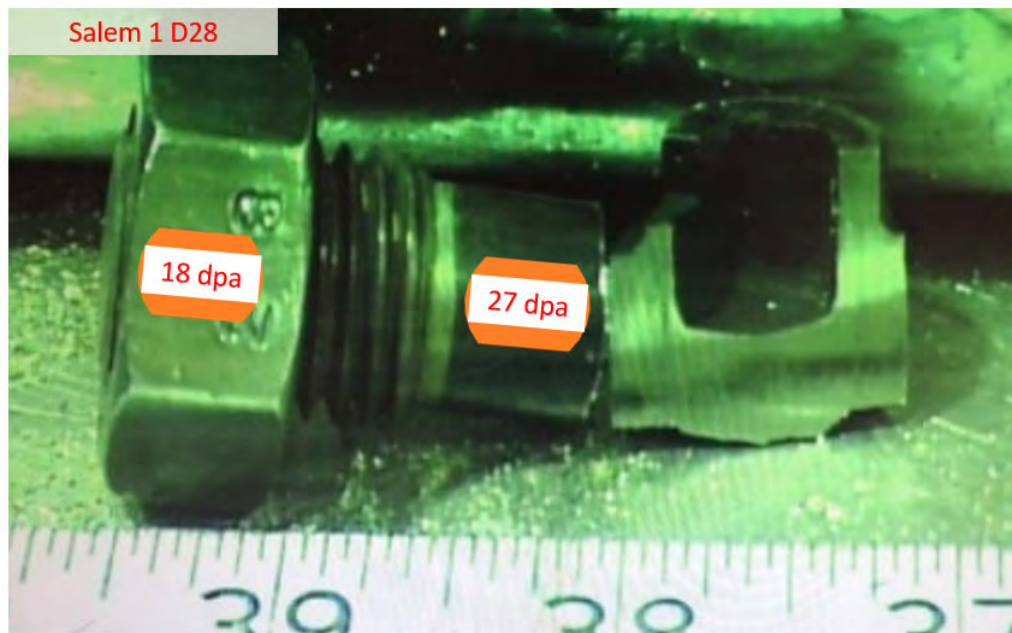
Approximate locations for specimen machining for Salem 1 bolt D28. The 18 dpa sampling location is at the end of the threaded portion of the bolt, obscured by the nut used for ID purposes.
